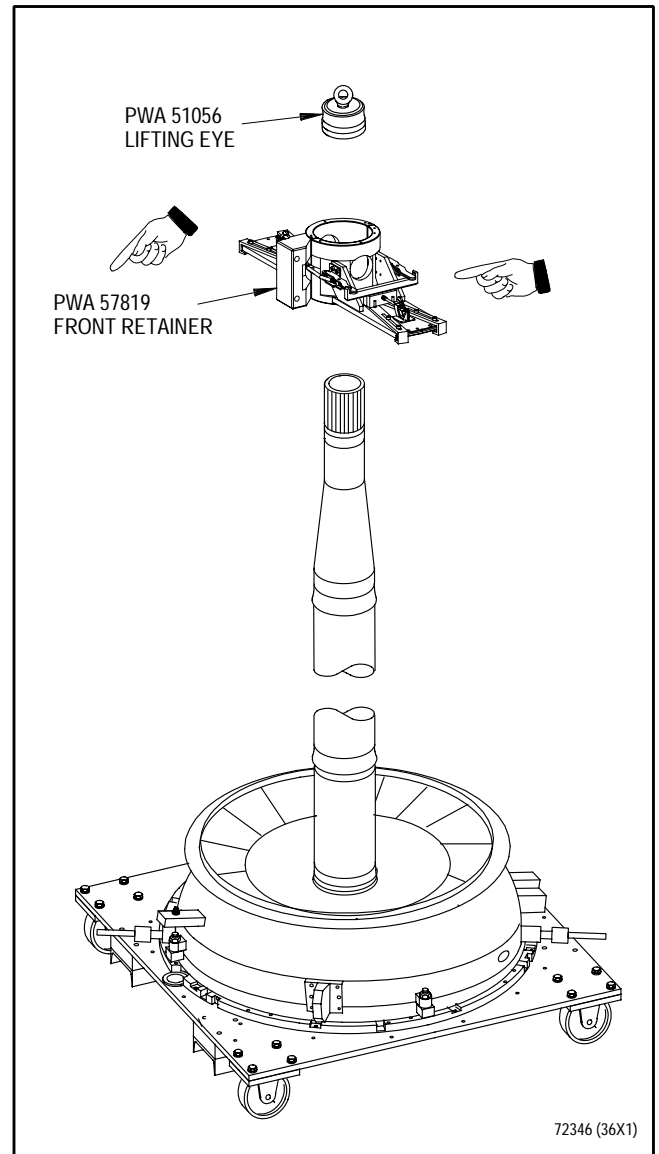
Front Compressor Drive Turbine Rotor and Stator Assembly - Balancing Tooling Removal (Sheet 3 of 6)
